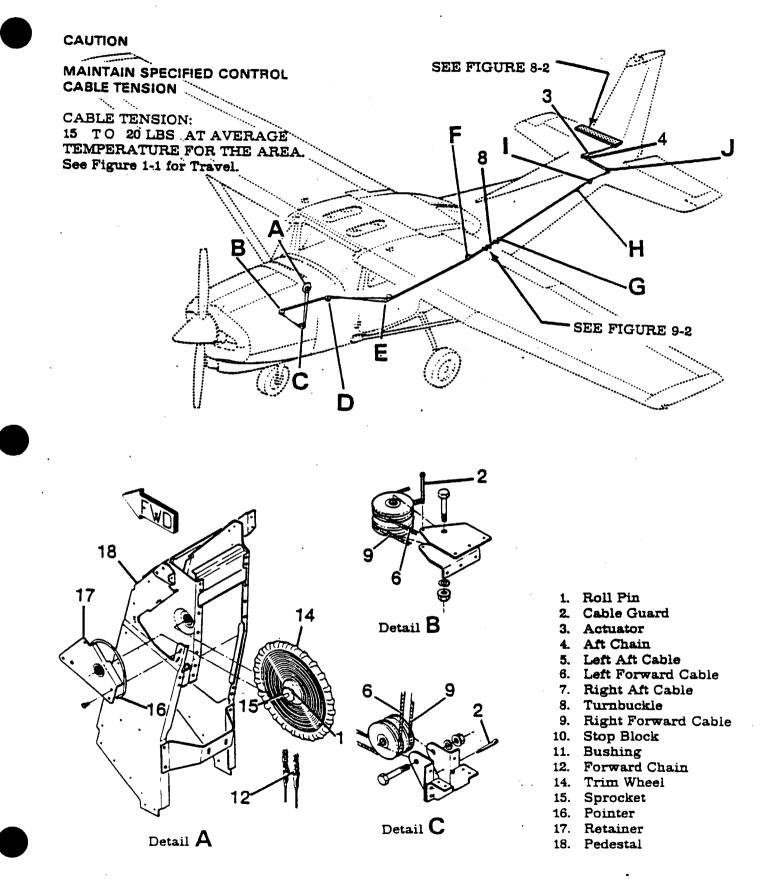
Elevator Trim Tab Control System (Sheet 1 of 2)
